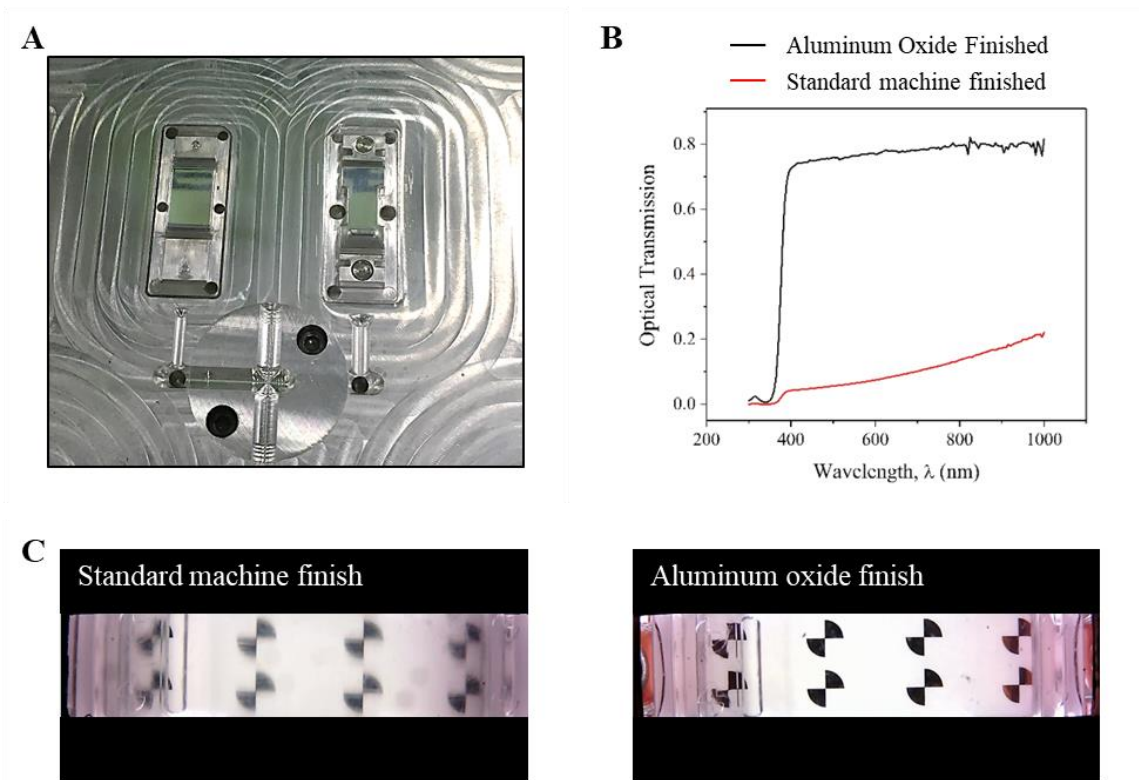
Injection molding of HemeChip and effect of the mold finish on optical quality. (A) HemeChip is fabricated using injection molding of general-purpose commercial grade PMMA. The figure shows HemeChip body parts just after the injection molding process. The metal electrodes are embedded in the bottom part of the HemeChip during the injection molding process. (B) Optical transmission comparison between HemeChip parts made from the standard machine-finished mold (red line) and aluminum (oxide) finished mold (black line). (C) The optical clarity of the HemeChip with two different surfaces finished implemented into the mold. The left image shows the visual clarity for HemeChip, where the mold was just machine finished. The right image shows the improved visual optical clarity after the mold has undergone through aluminum oxide polishing.
